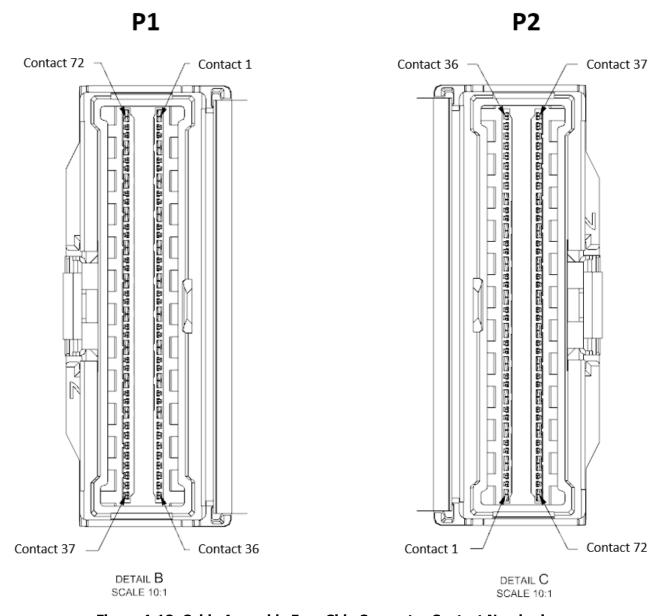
Cable Assembly Free-Side Connector Contact Numbering
